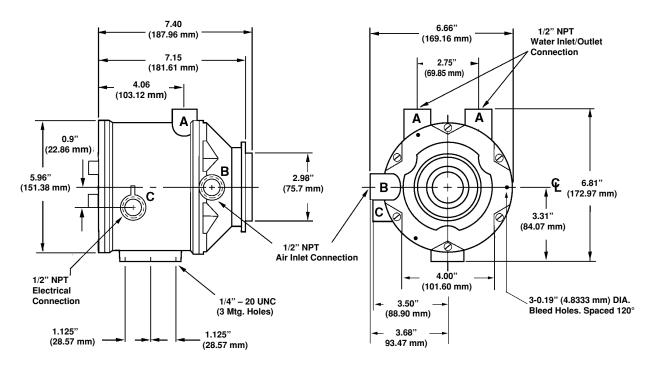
DIMENSIONS AND CLEARANCES OF WATER-COOLED CASTING
